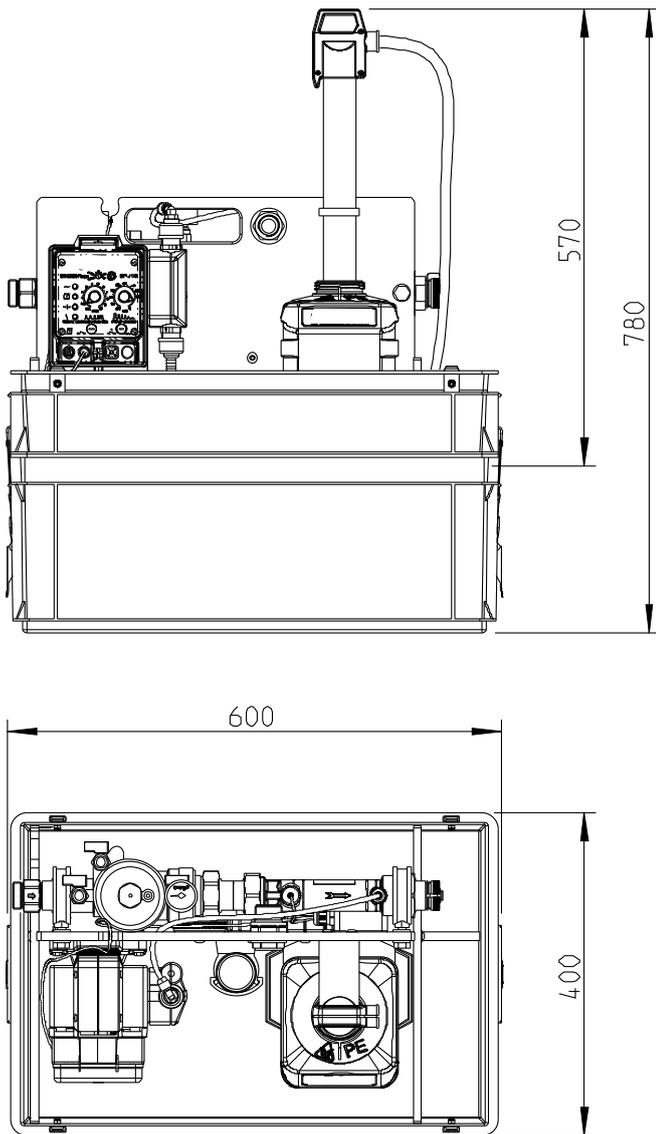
Dimensional drawing of the dosing system MOBIdos
